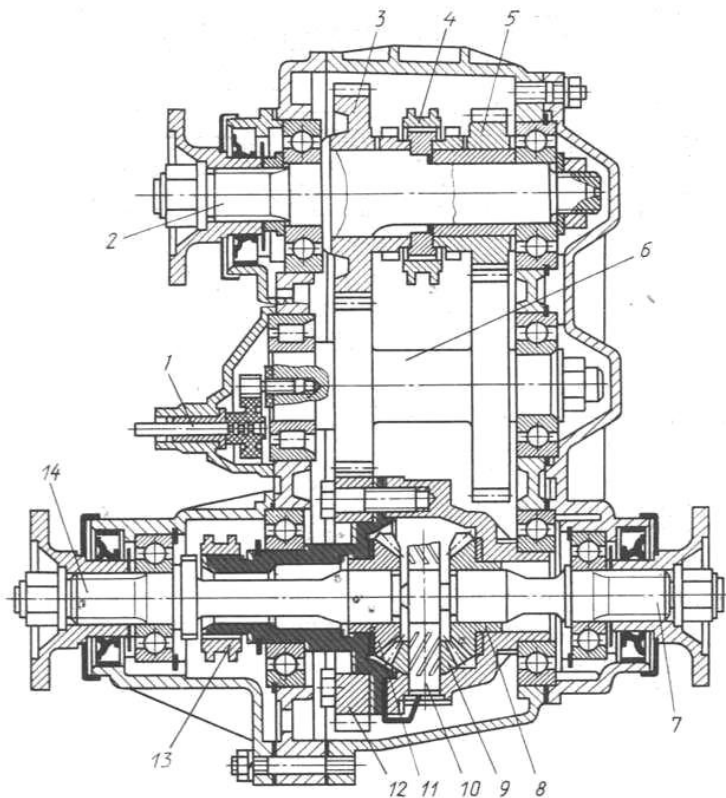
Distribution box of the VAZ-2121 "Niva" car: 1- speedometer drive; 2nd drive shaft; 3rd high transmission gear; 4-gear coupling; 5th lower transmission gear; 6th intermediate shaft; 7-rear axle drive shaft; 8th and 11th differential gears; 9th differential satellite; 10-satellite axis; 12th differential case gear wheel; 13-differential locking clutch; 14-front axle drive shaft.
